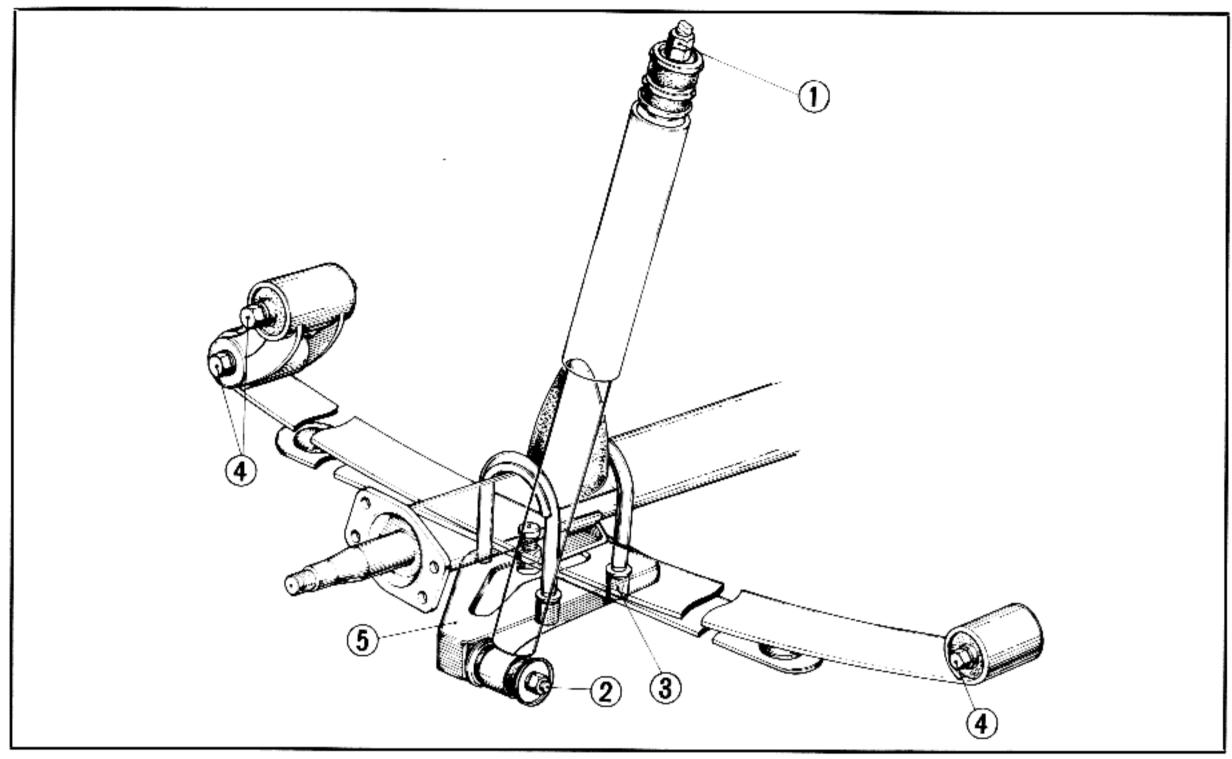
① Rear Dumper Duble Nut 1.2-1.5 kg-m
